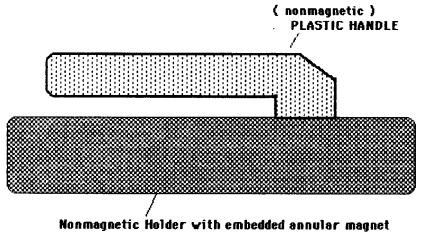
A—Side view of magnet assembly for the pacemaker emergency intervention system
